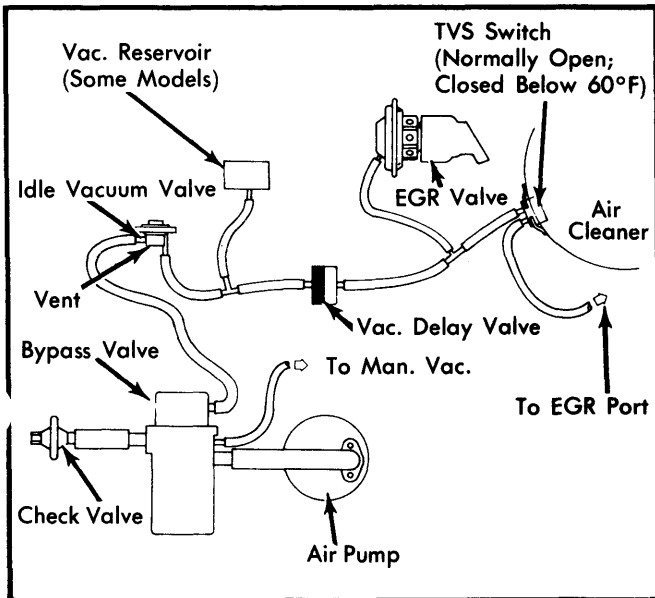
Schematic of Ford Motor Co. Air Injection System with Idle Vacuum Valve
